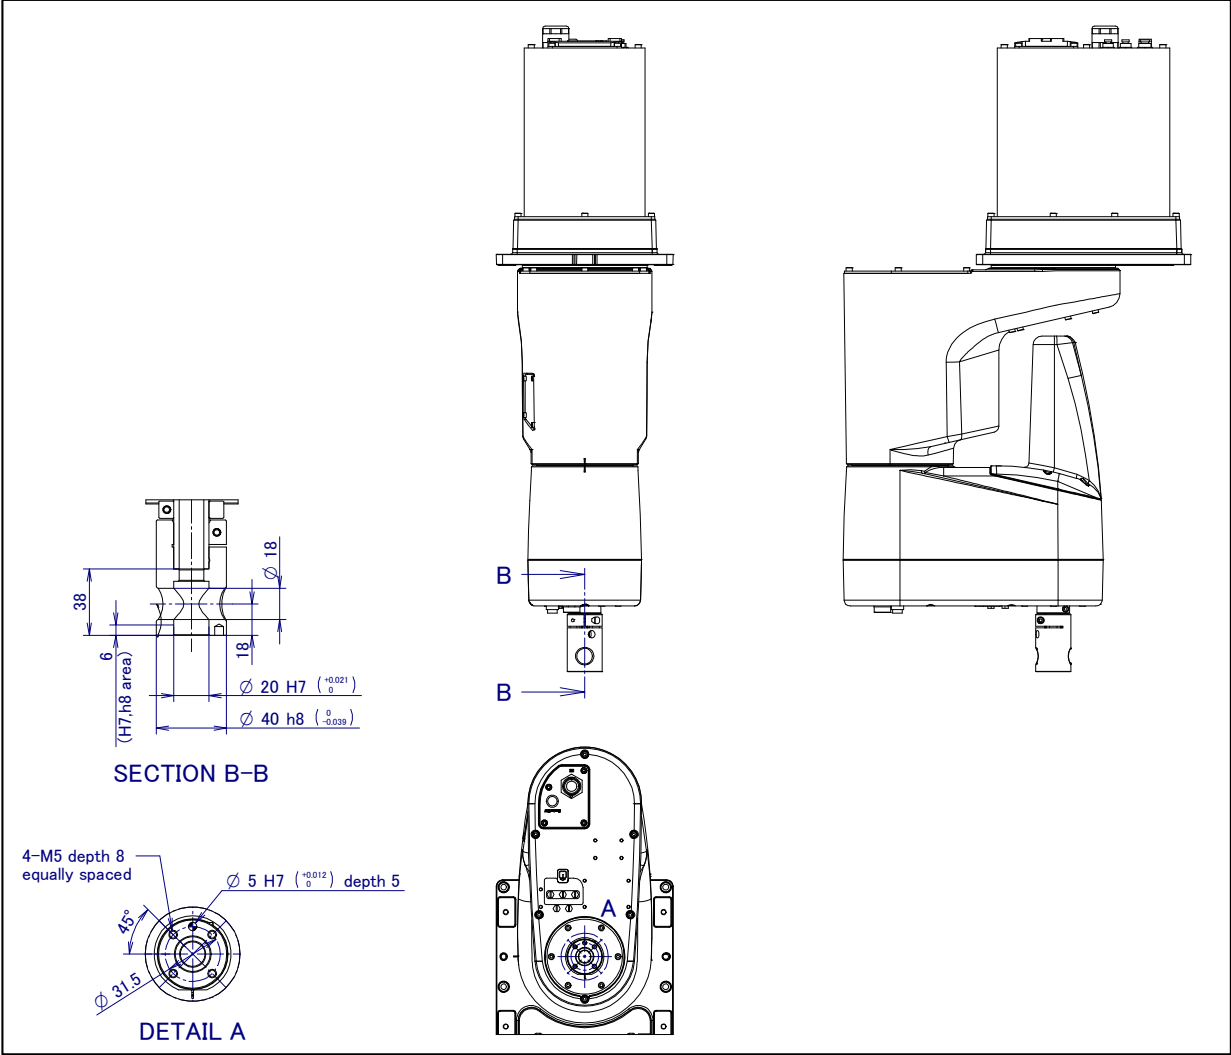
(b) Equipment mounting faces (tool flange option)
